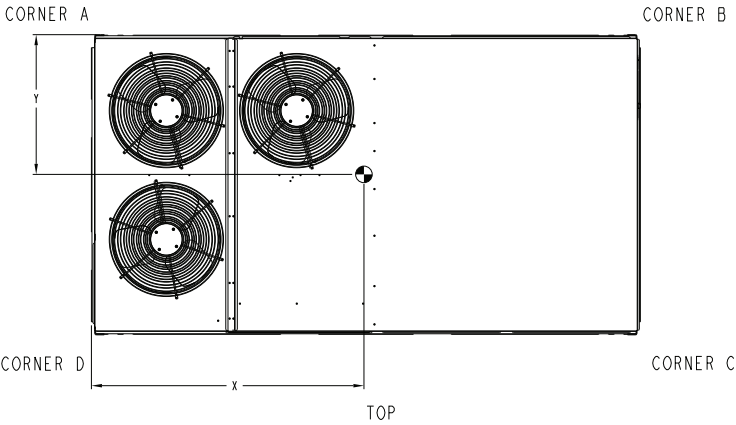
50GEQ-12 Unit Dimensional Drawing
